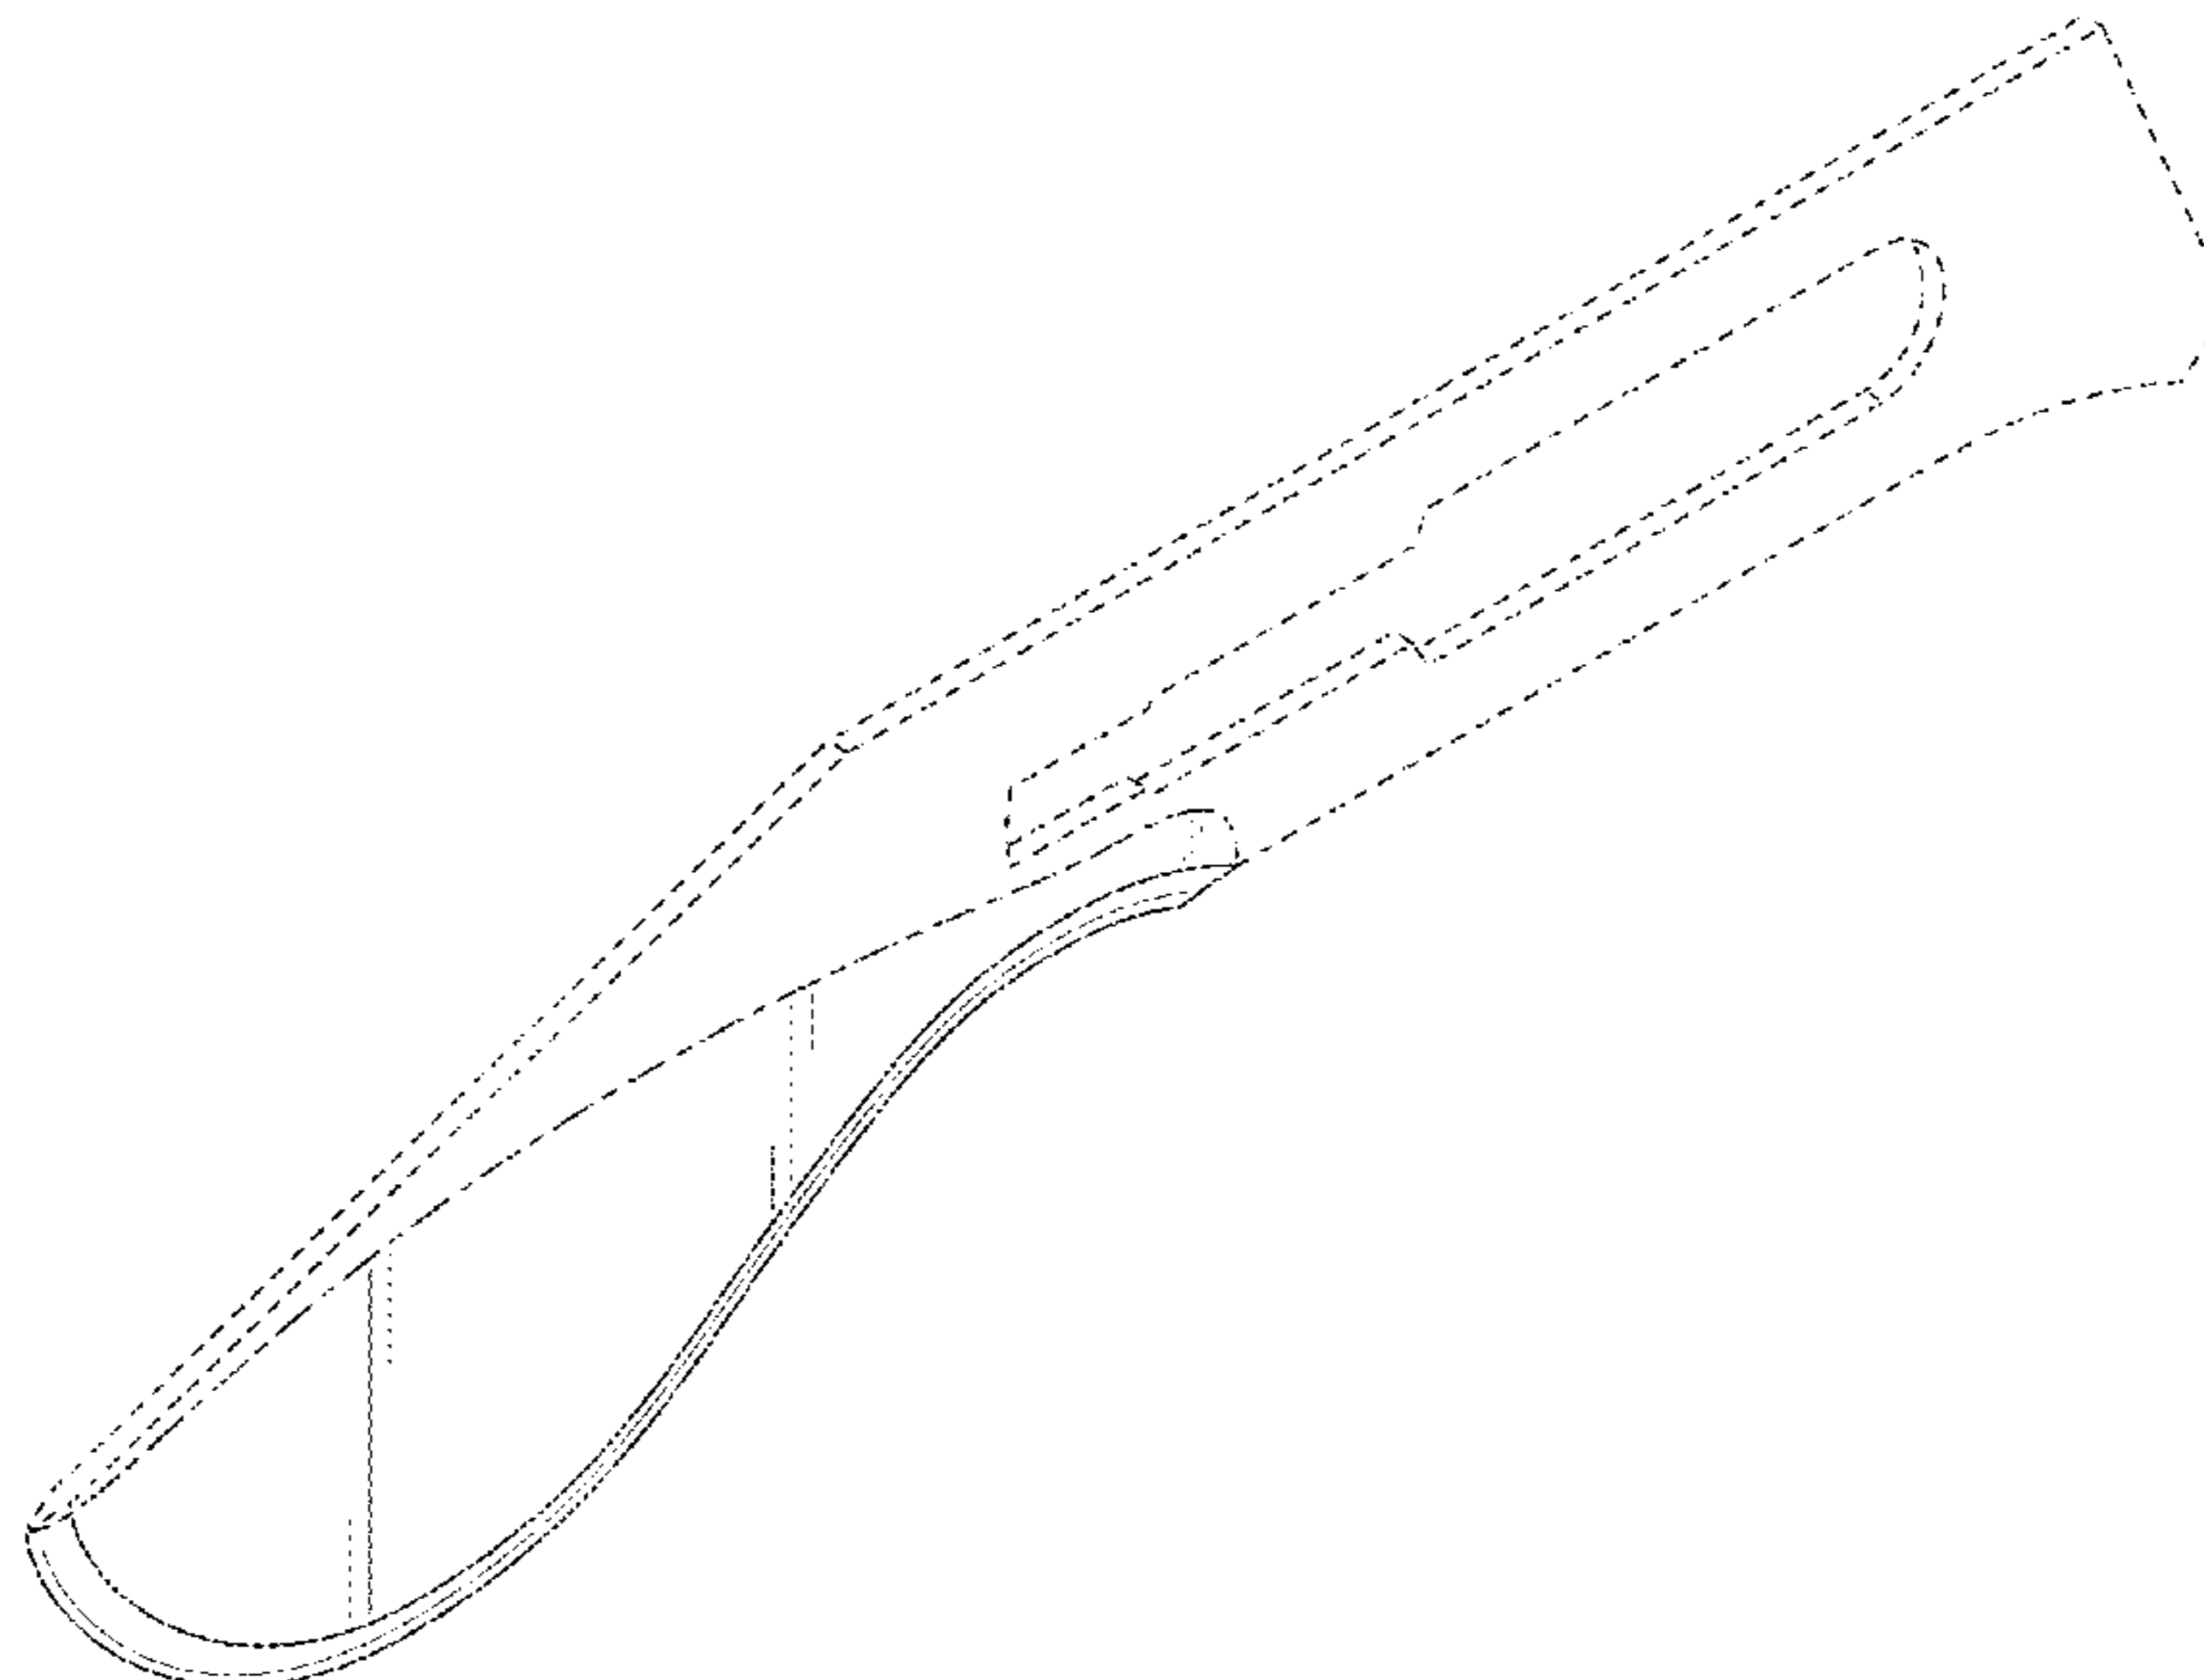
is a front, right-side perspective view of a knife blade in accordance with my design;
